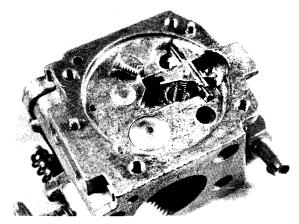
Inlet Needle, Lever and Pin in Place with Retaining Screw Removed
